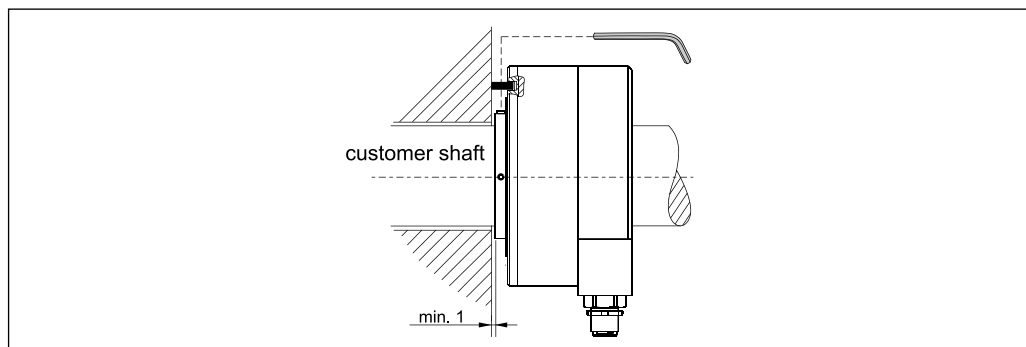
Type with dowel pin in assembled condition with  $\varnothing 50H7$
